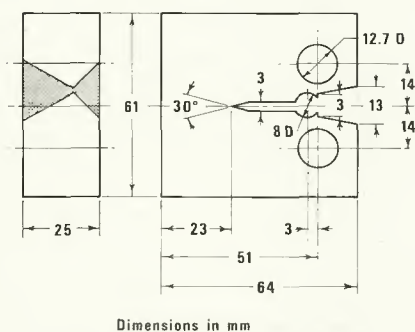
Modified compact specimen showing notch location for HAZ tests (25.4 mm = 1 in.)
